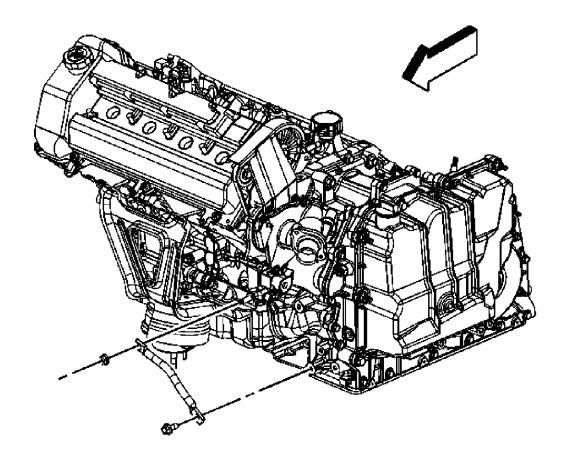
View Of Transaxle Brace & Bolt Courtesy of GENERAL MOTORS CORP.
